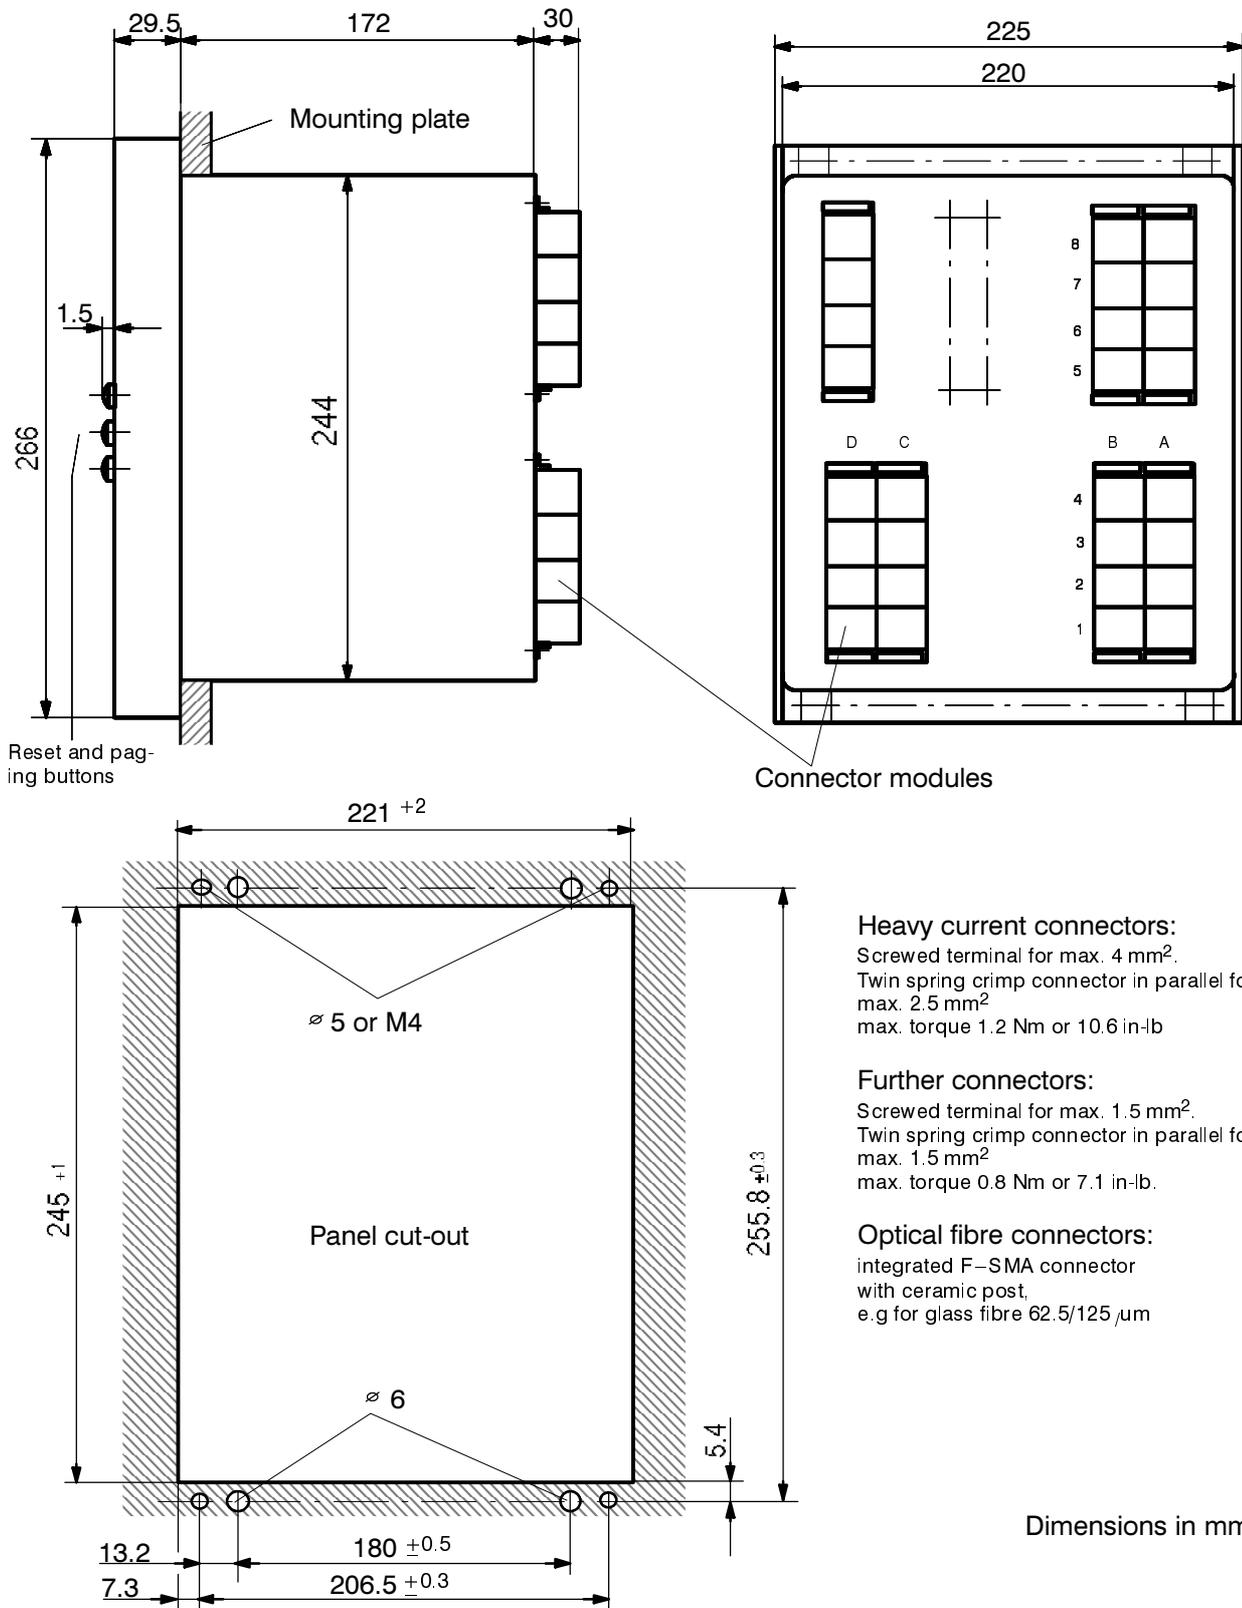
Dimensions for housing 7XP2040-2 for panel flush mounting or cubicle installation
